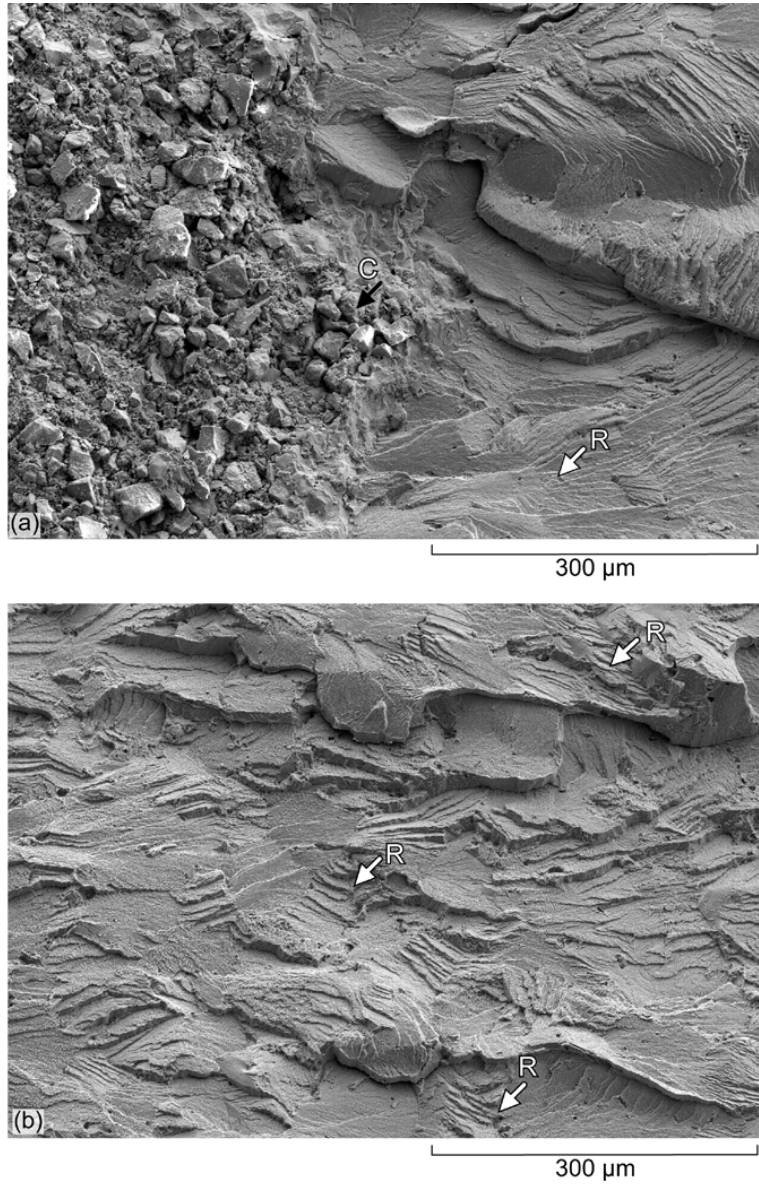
Fracture origin and adjacent fracture surface for aged Cast-A specimen showing river patterns (R) indicating brittle fracture and particulate contamination (C) at fracture origin.
